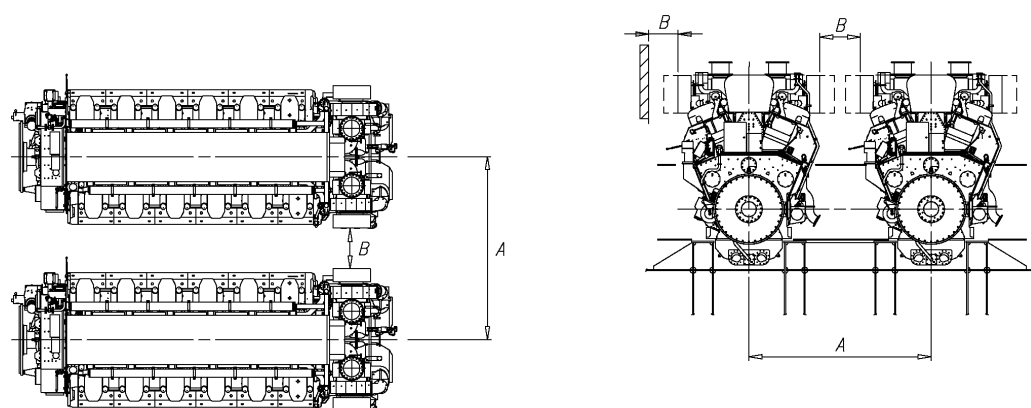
Crankshaft distances, V-engines (3V69C0319D)
